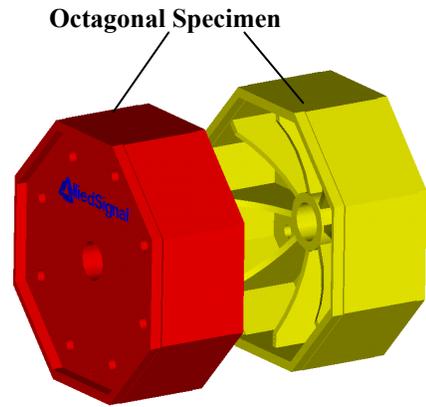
Multi-purpose universal welding & testing system (consists from welded together two octagonal specimens. Thickness of weld beads is: 6; 5; 4 and 2,5 mm)
